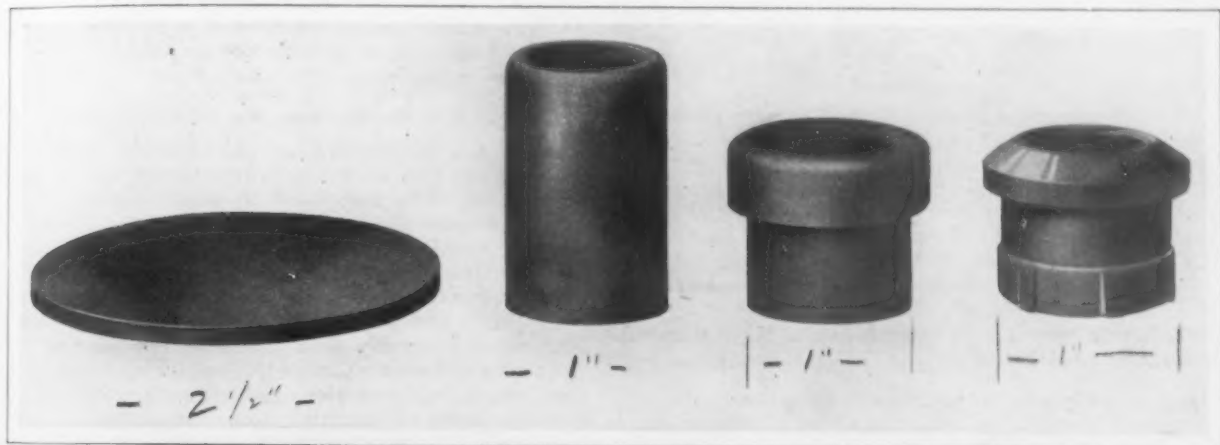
View Showing Successive Operations in Drawing the Male Part of the Union
